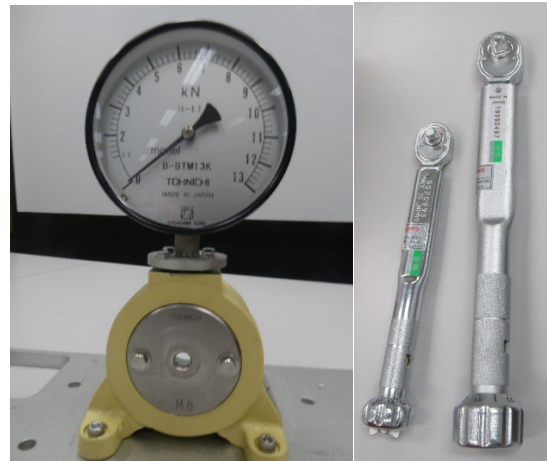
(Left) Hydraulic axial force meter. (Right) Preset type torque wrench.
